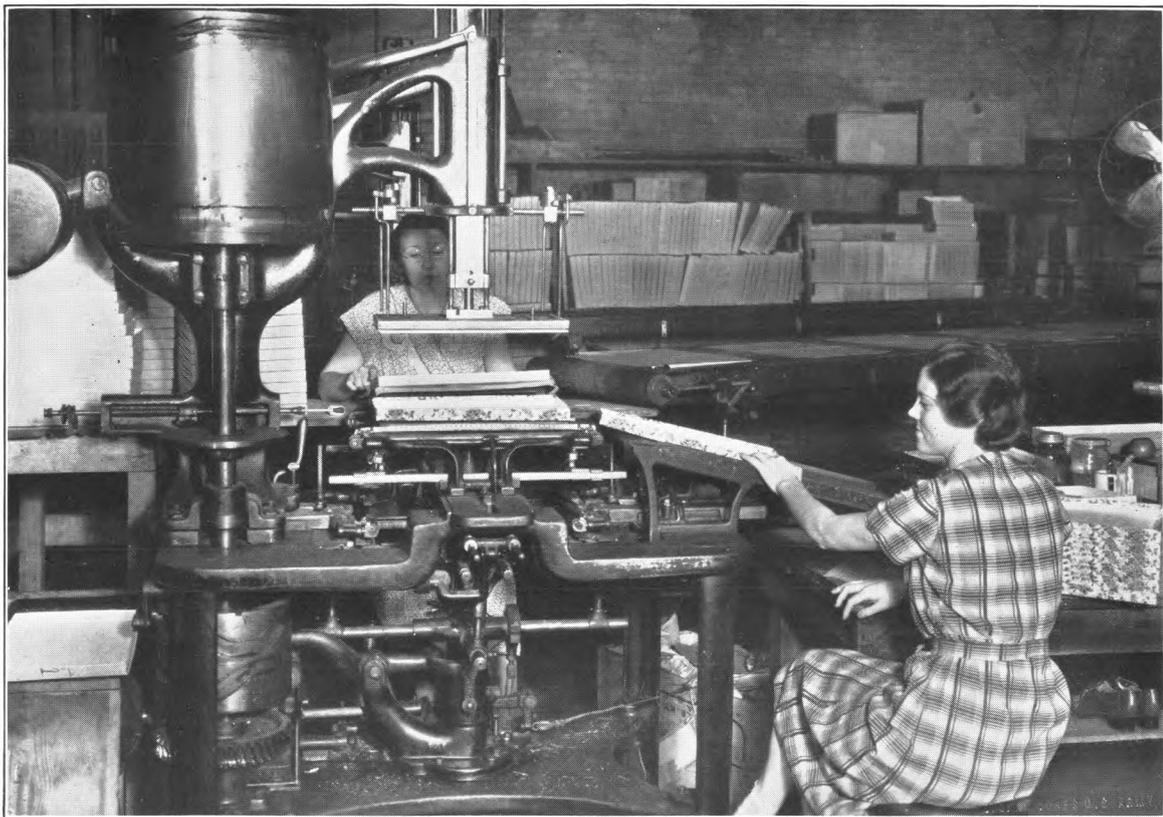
COVERING BOXES ON A WRAPPING MACHINE.
